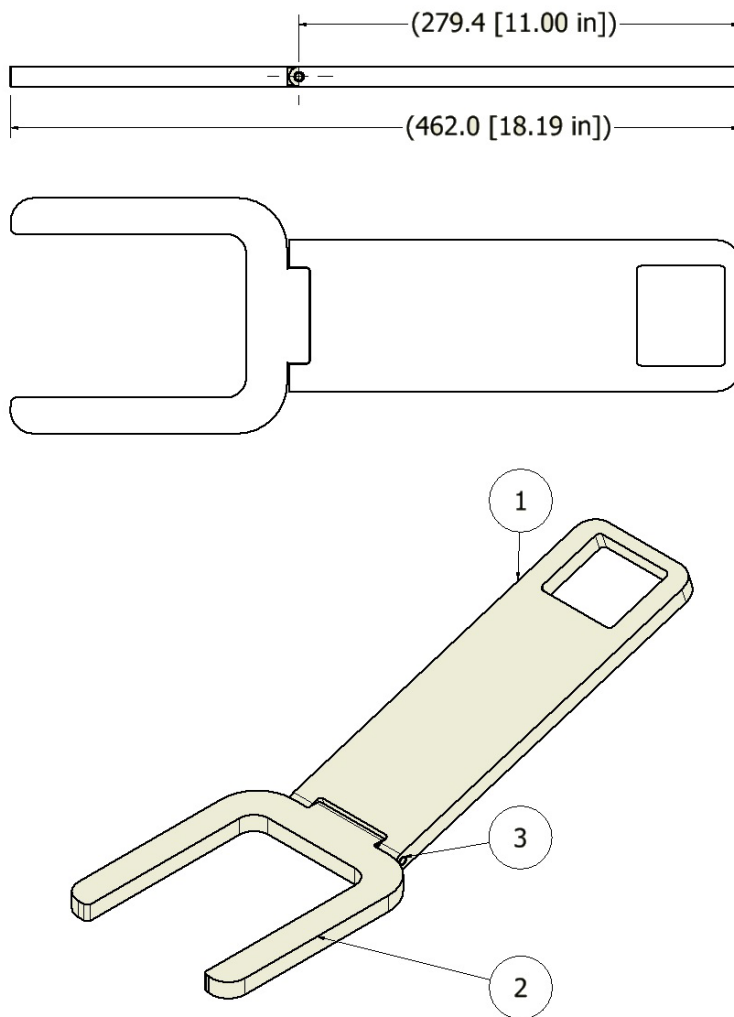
Hinged Weight Gauge–Newborn Assembly Drawings and Parts List
